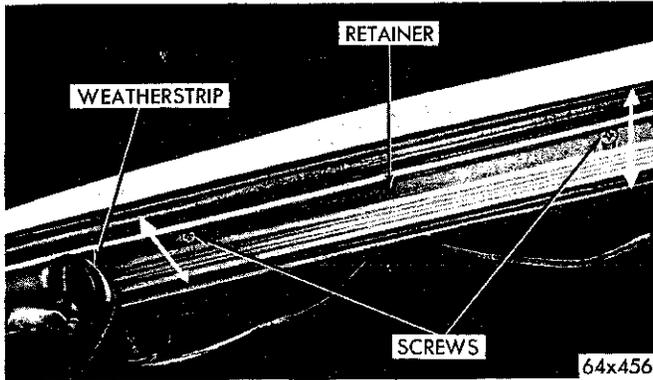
Roof Side Rail Weatherstrip Adjustment
